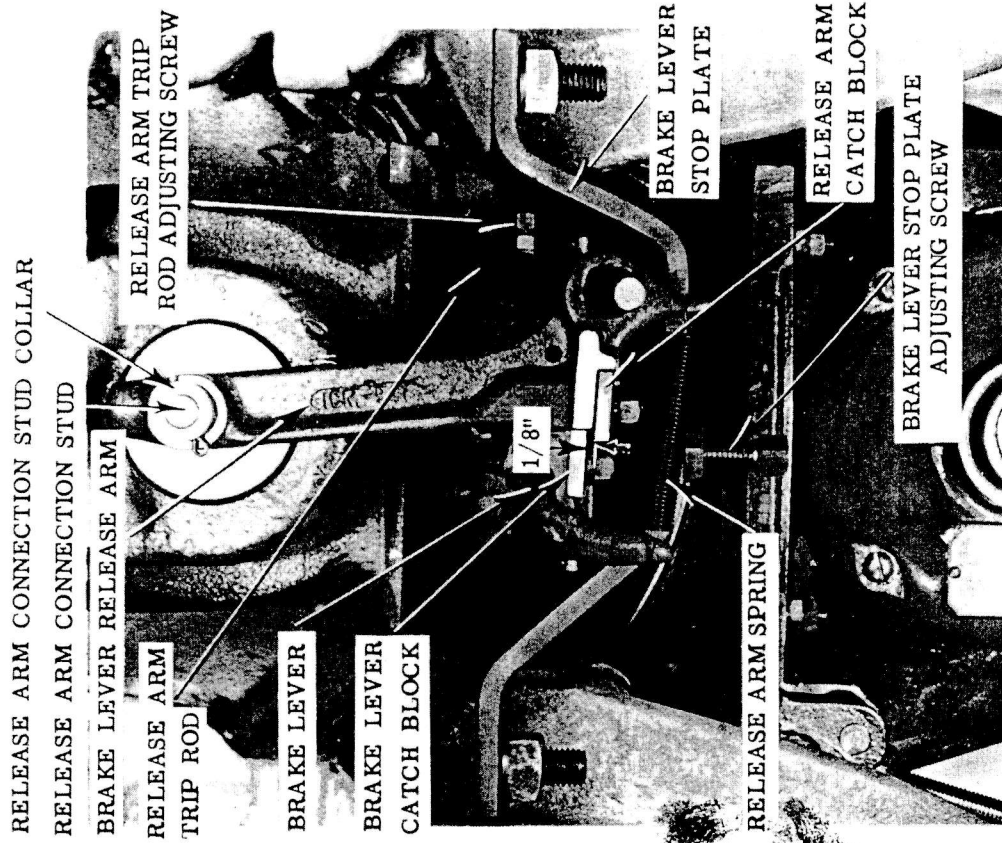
Brake Parts - Beam at Bottom of Stroke
